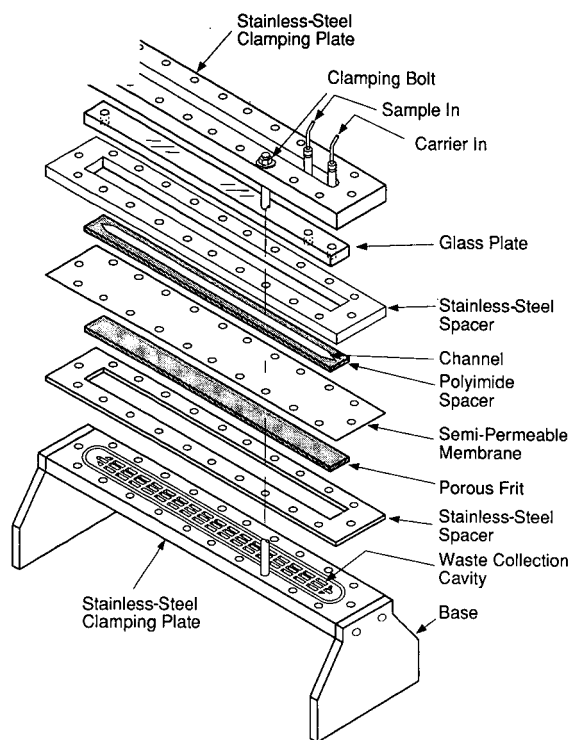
Asymmetric FIFFF channel assembly: exploded view.
